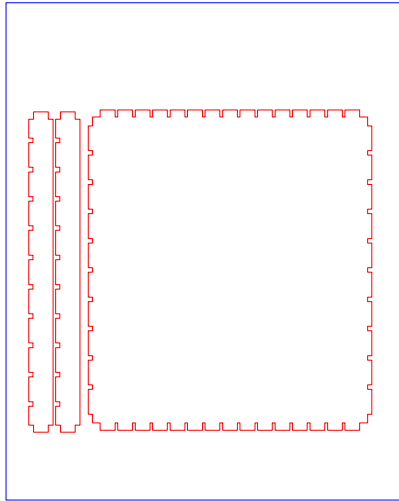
AutoCAD drawing of the side and top pieces for the computer cover
